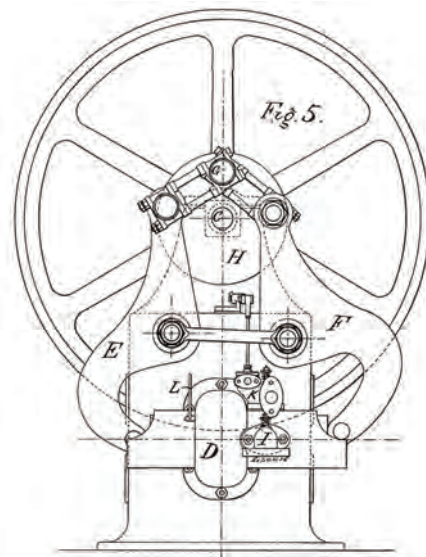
Patent drawing of the Atkinson "Differential Engine", 1882 [7]
